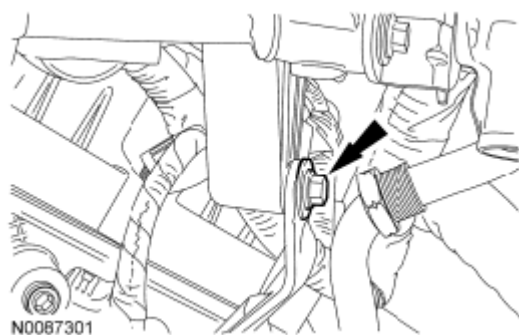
Locating Upper Intake Manifold Bracket Bolts
